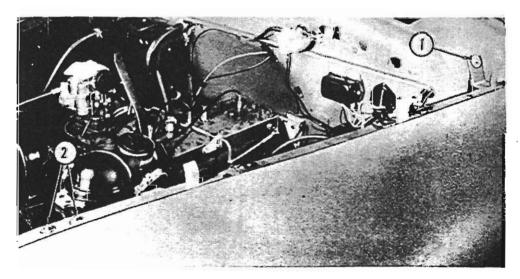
Take Out the Fender to Body Upper Bracket Screw and the Two Fender to Core Cradle Bracket Screws.
